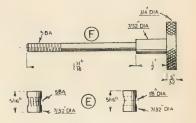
The brake shoe trunnion nuts E, and the brake screw F
